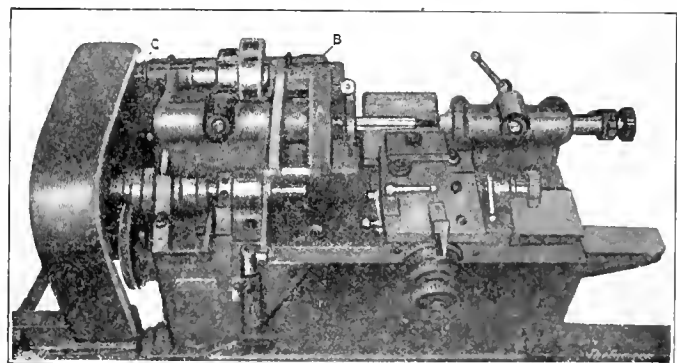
PLAN VIEW OF PRECISION SCREW-CUTTING LATHE
